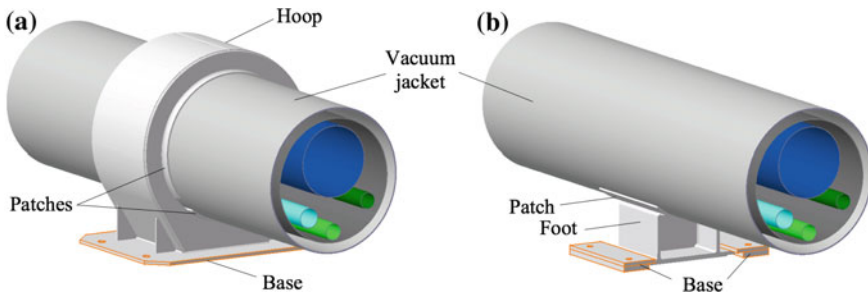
External envelope supporting elements: a fixed support and b sliding support
